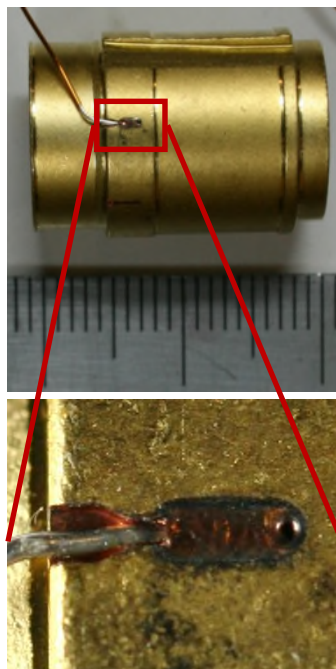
Silver-coated copper wire welded to gold-coated copper tube
